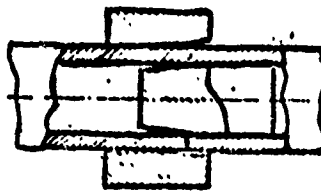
The scheme for welding of tubes with bi-axial forced formation of flash.
